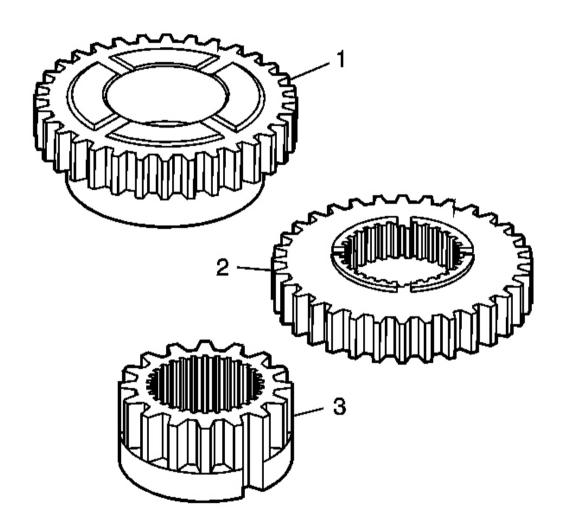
Inspecting Teeth On Front Sun Gear, Rear Sun Gear & Inner Lockup Hub Courtesy of GENERAL MOTORS CORP.
